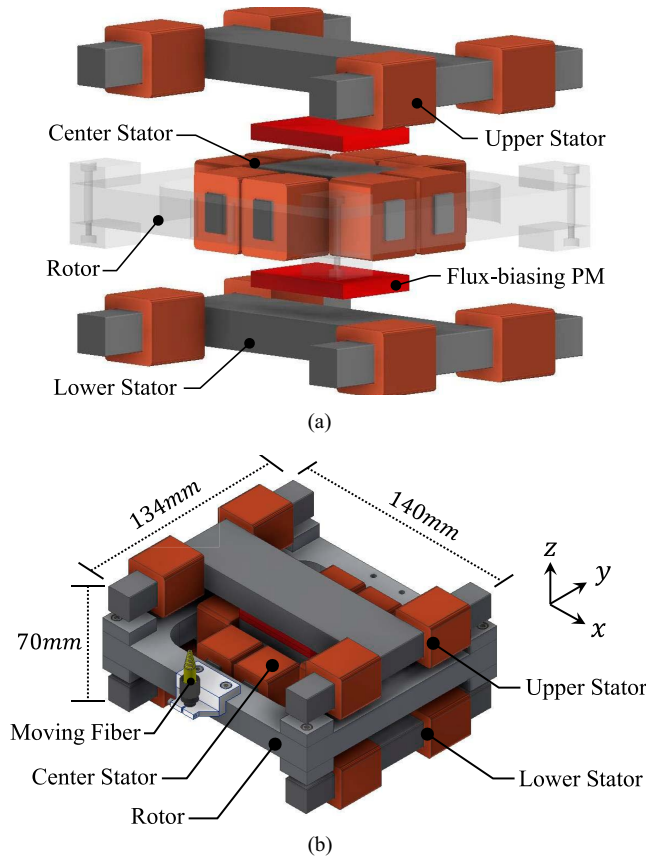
3-D rendering of the proposed six-DOF magnetic levitator. (a) Exploded view showing three parts of stators (upper, lower, and center) connected by flux-biasing PMs and a rectangular rotor. (b) Assembled view with a moving fiber carried by the rotor.
